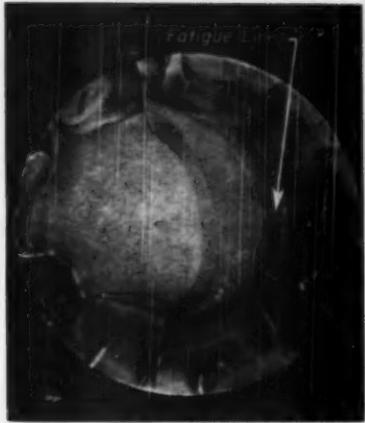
Shaft, 4 3/4 In. Diameter, Made of Silicon-Manganese Shock Resisting Steel. Shows characteristic fatigue failure at a change of section
